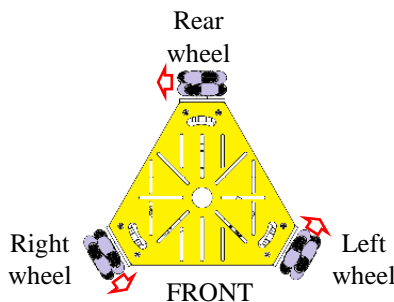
Top view of the robot platform with 3 omni wheel drive
